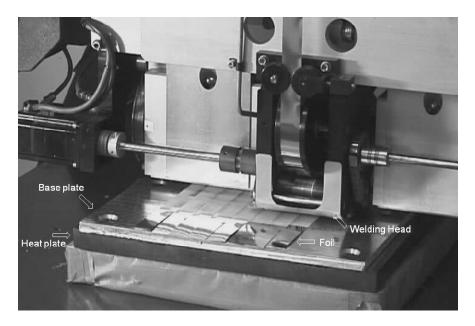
Base plate and part fixture in the Solidica Formation[™] machine
